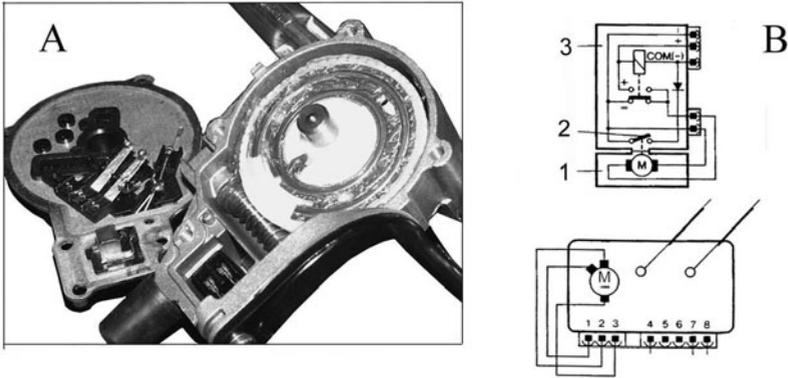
Open wiper reduction gear (A) and electric scheme of the wiper system (B).
